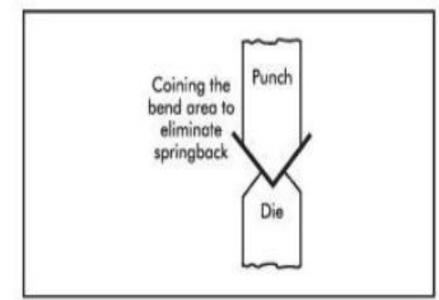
Coining the bend requires high tonnage to obtain a sharp, accurate bend.
